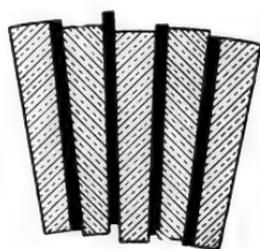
Showing objectionable and defective arrangement of Segments.
